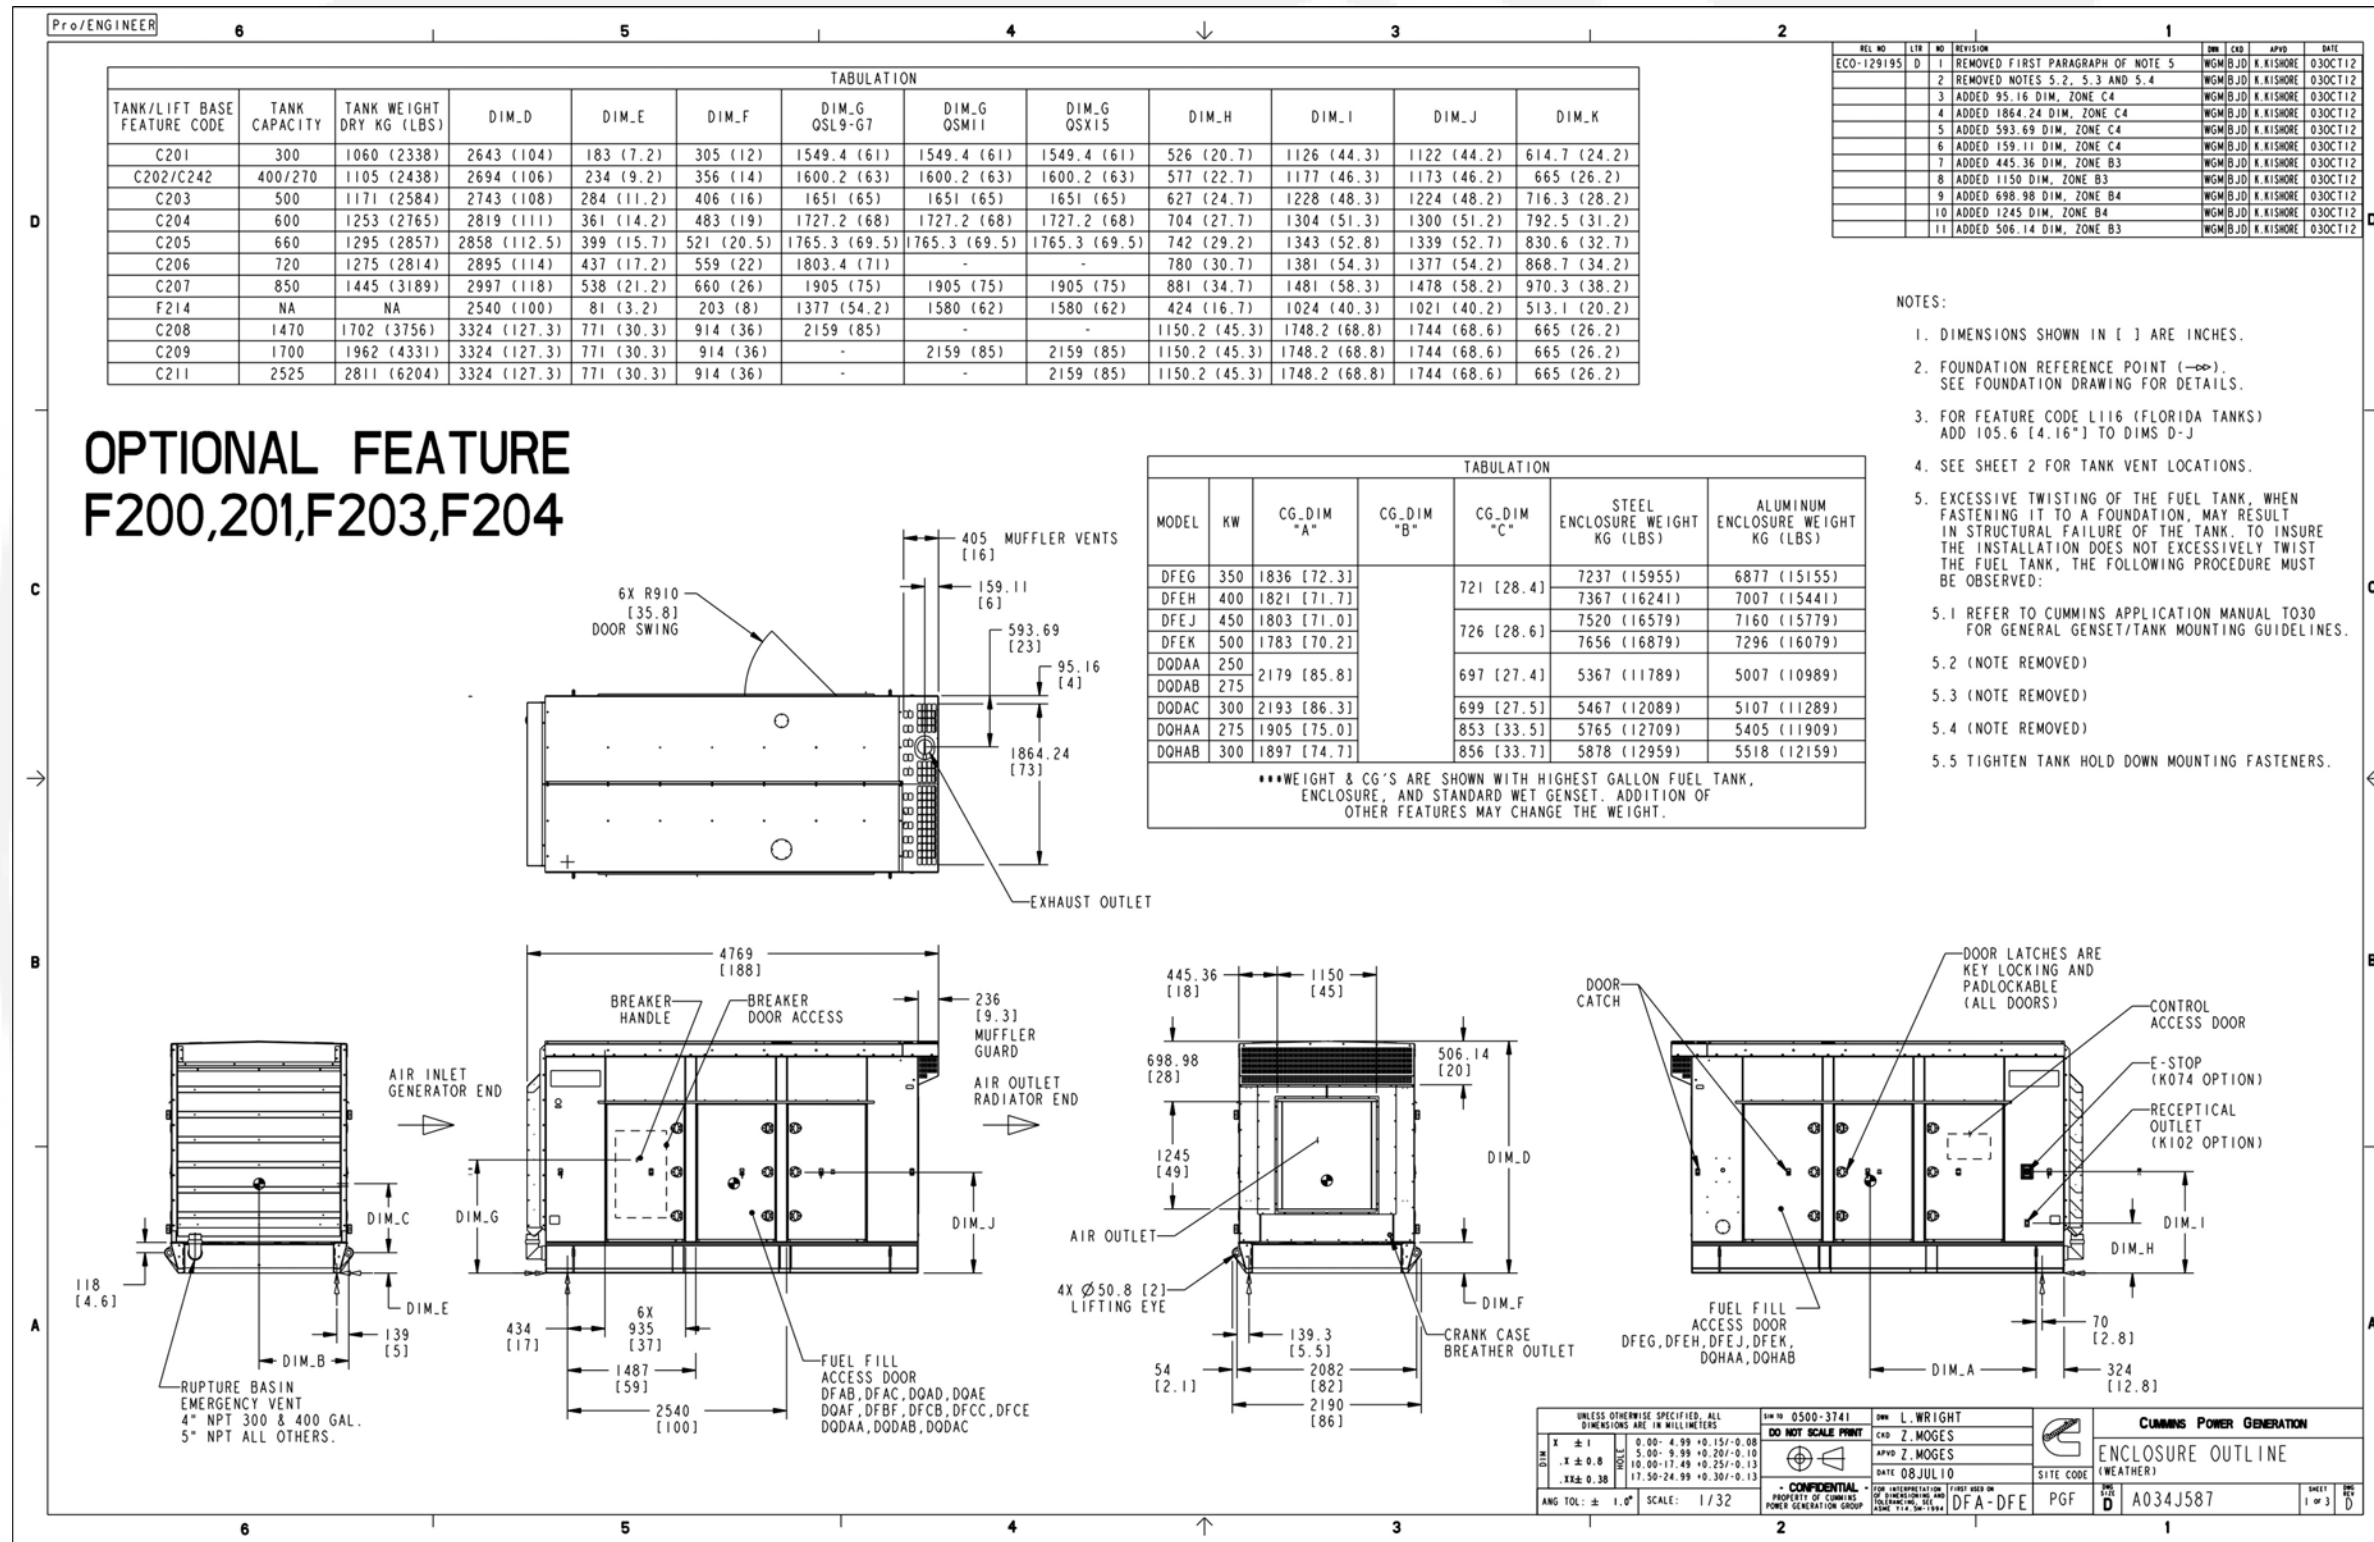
ENCLOSURE OUTLINE DRAWING (WEATHER) (SHEET 1)
